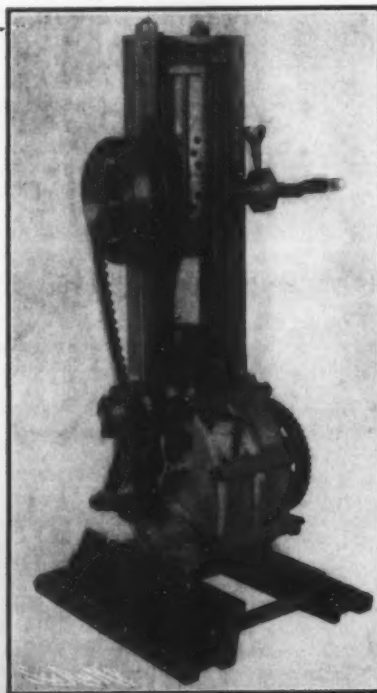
Motor With Half of Cylinder Casing Removed.
